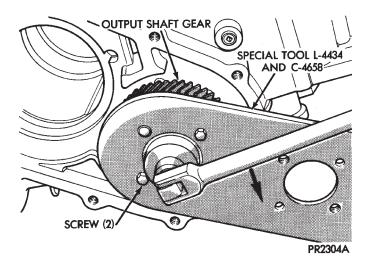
Tighten Output Shaft Retaining Nut to 271 N●m (200 ft. lbs.)
